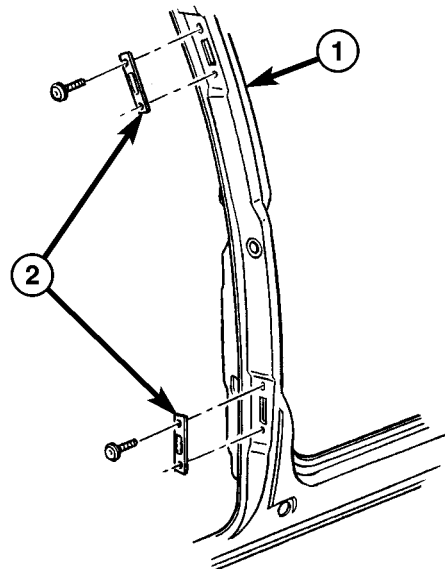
SLIDING DOOR STABILIZER SOCKET
